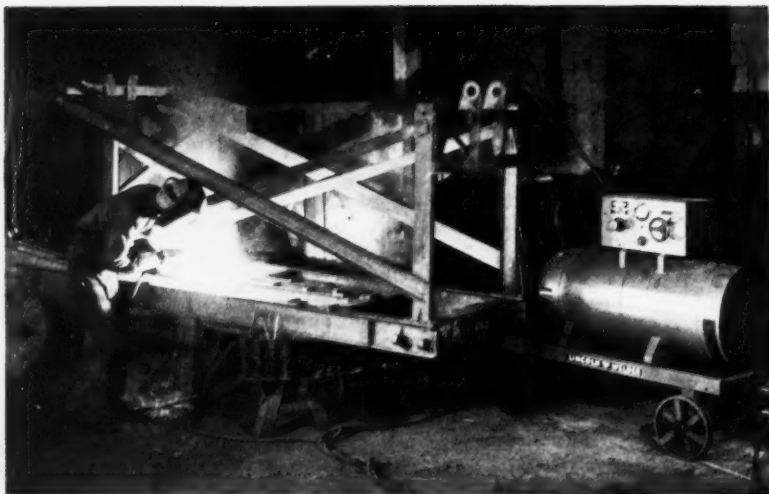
Constructing the Frame of the Well Drilling Machine Shown in Fig. 2 by Welding
